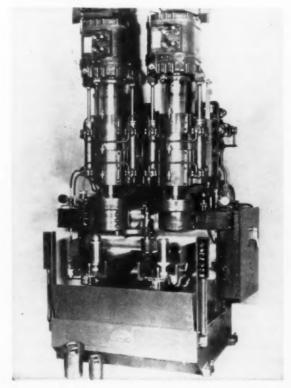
Designed to automatically test capacitor windings this machine replaced the old method of hand testing. It segregates defective windings including shorts and out-of-limit windings.
